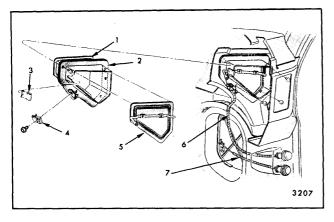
Shroud Center Duct Upper Air Outlet and Door - "B & C" Styles
